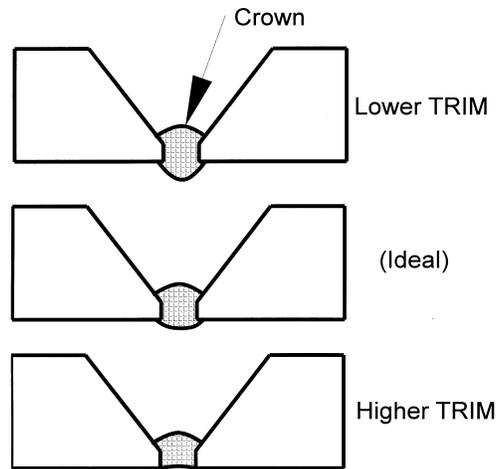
Cross section of typical tack/root welds in relation to the TRIM setting.
